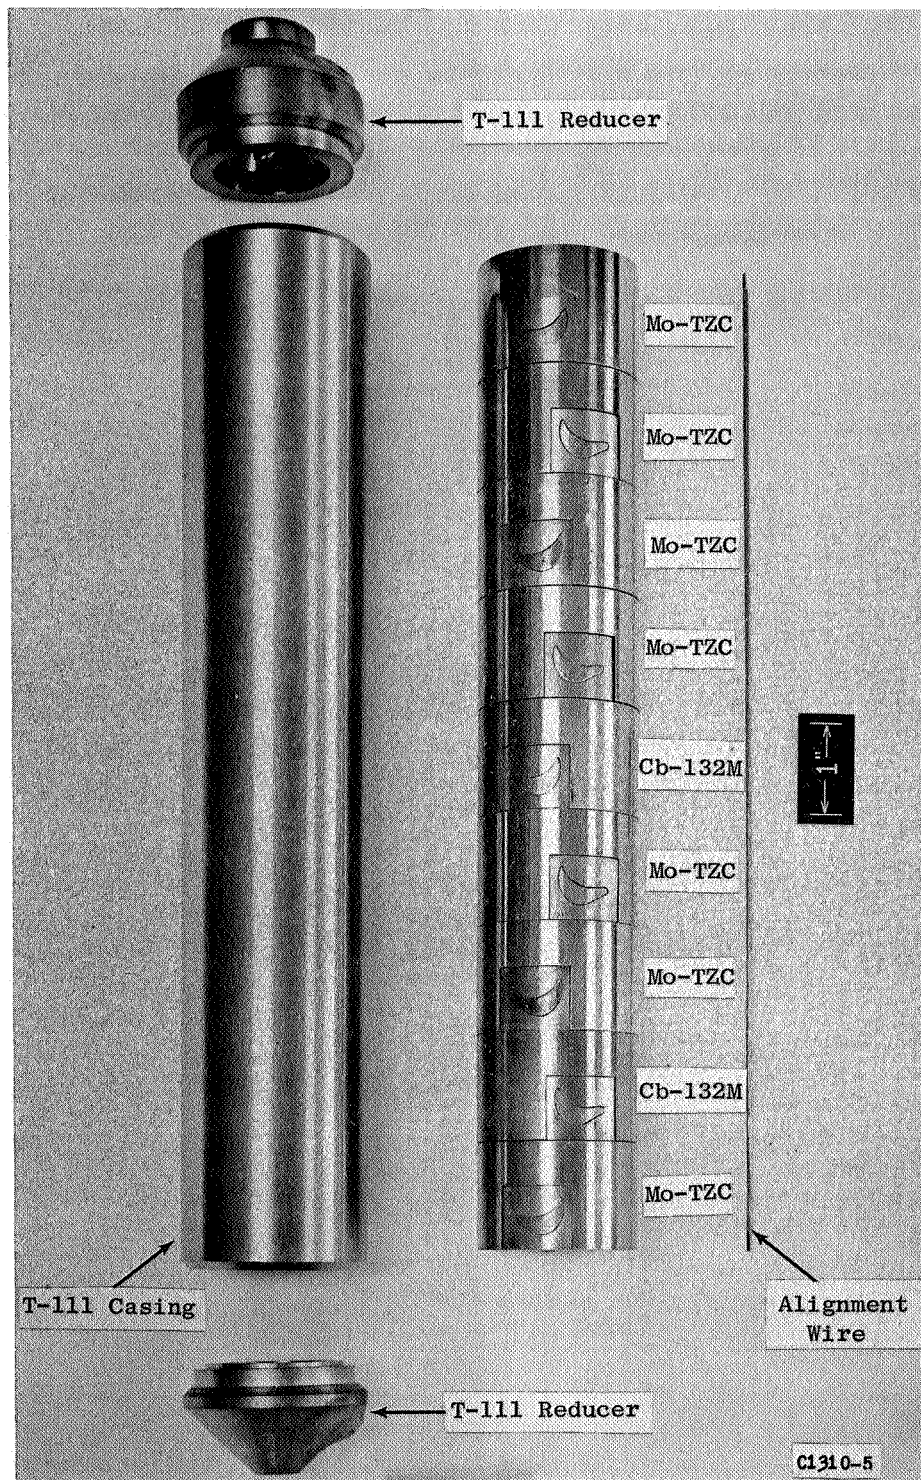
Turbine Simulator (Stages 2 to 10) of the T-111 Corrosion Loop I Prior to Assembly.
